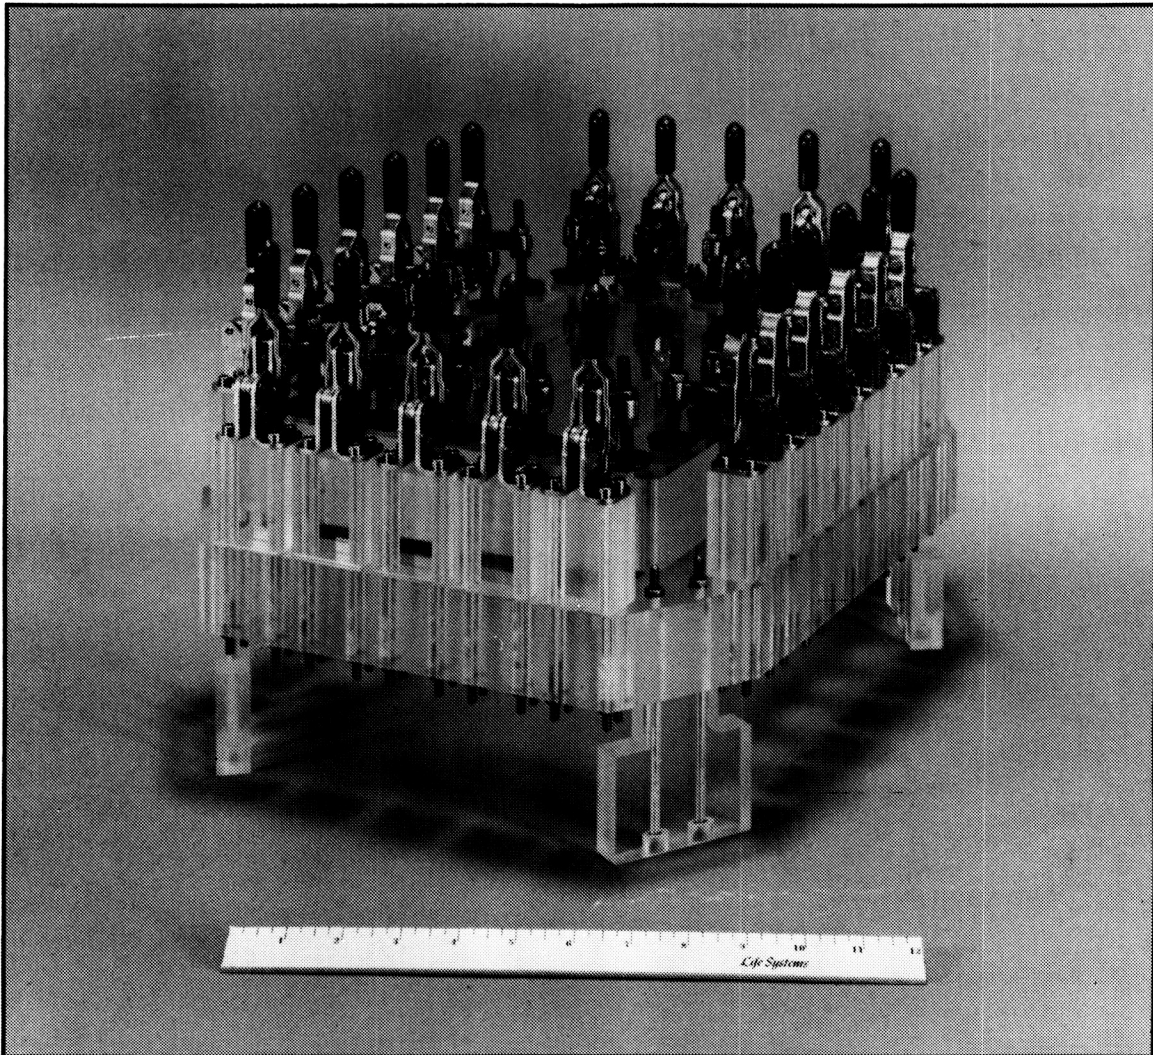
ELECTROLYTE MANAGEMENT CELL CORE CHARGING FIXTURE - ASSEMBLED
